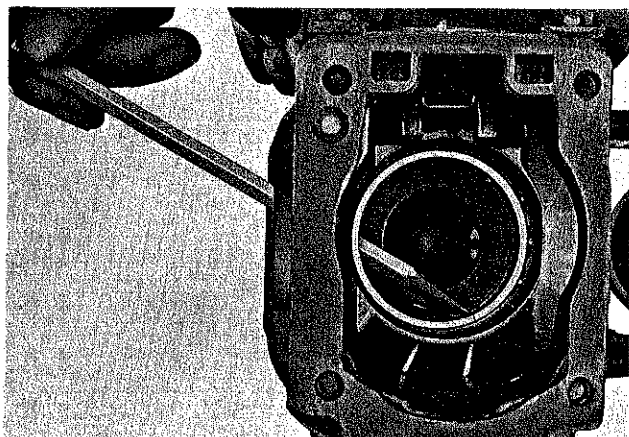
Taper of the cylinder can be measured with a piston ring. End gap of the inserted ring as shown in the illustration can be measured with a feeler gauge. Measurements taken at both top and bottom of the cylinder will indicate taper by the difference between the two measurements. These measurements will also show proper end gap of the ring. It is important that the ring be square in the cylinder for accurate measurements. Use an inverted piston to push the ring into the cylinder and to keep it square with the cylinder wall.
